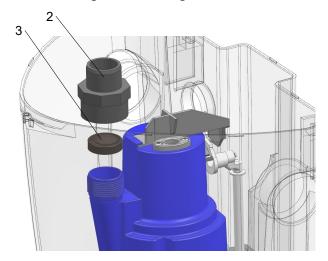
Fitting the fitting incl. the previously removed swing check valve
